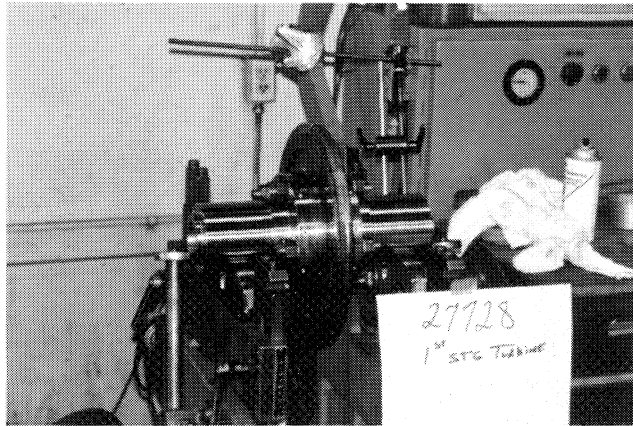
First Stage Turbine Wheel Mounted Between Mandrels for the Component Balance.
